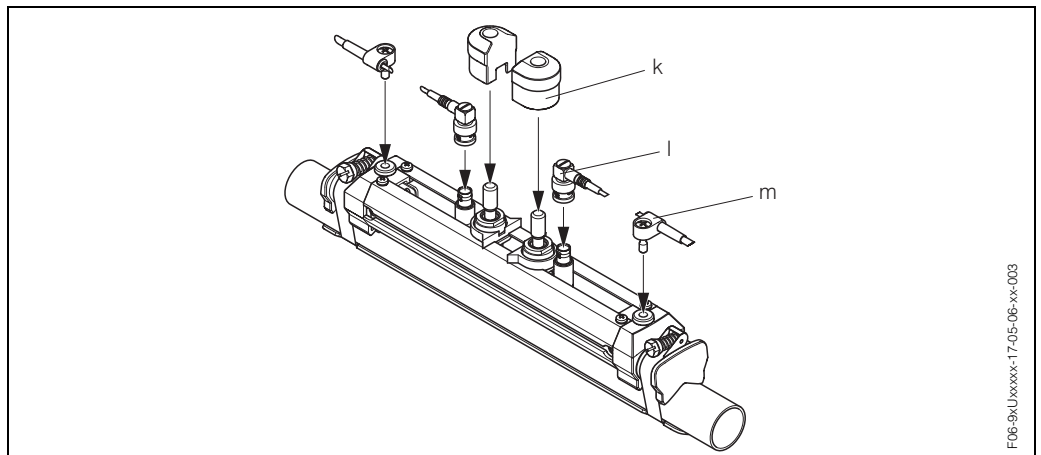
Fitting the sensor protection cap, mounting the sensor cable connector and grounding
